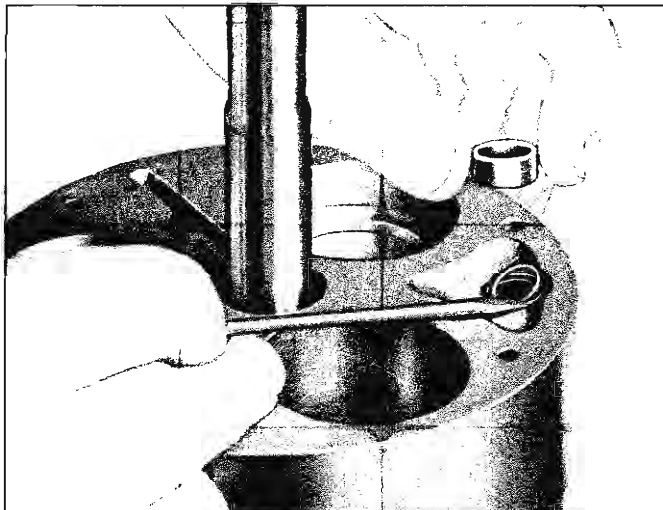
Installing Discharge Crossover Tube Front "O" Ring and Spacer
